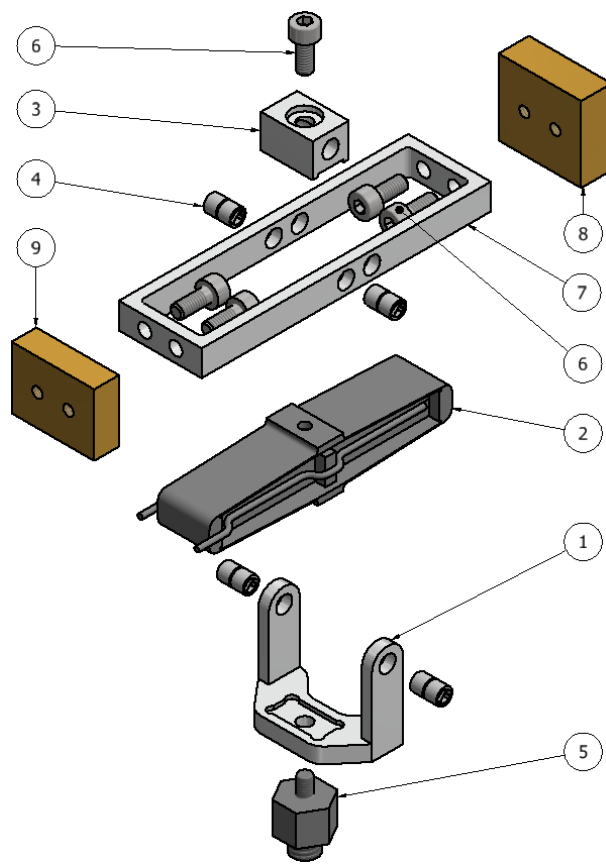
Exploded view of the designed flywheel piezoelectric inertial actuator.
